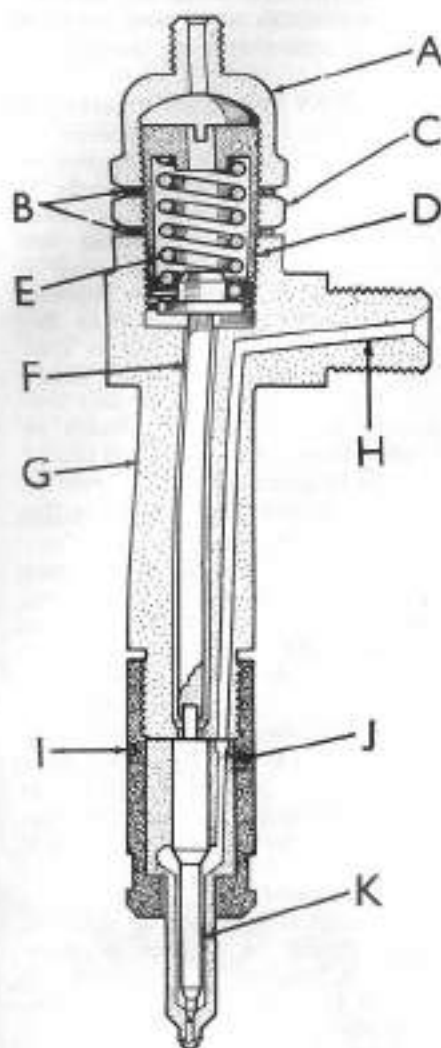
Cross-sectional view of injector assembly. Refer to Fig. 65 for exploded view and legend.
